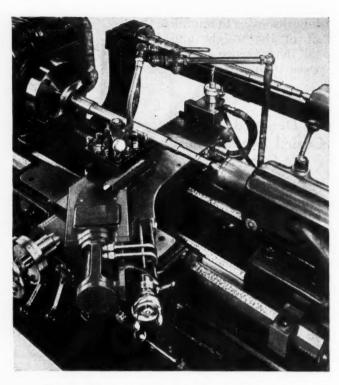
Close-up View of Hydraulic Duplicating Equipment on Lathe Shown in Fig. 1
